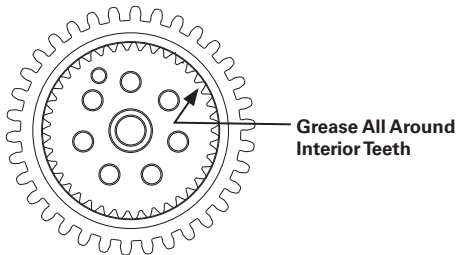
Slide Pinion Gear Off Pinion Shaft
